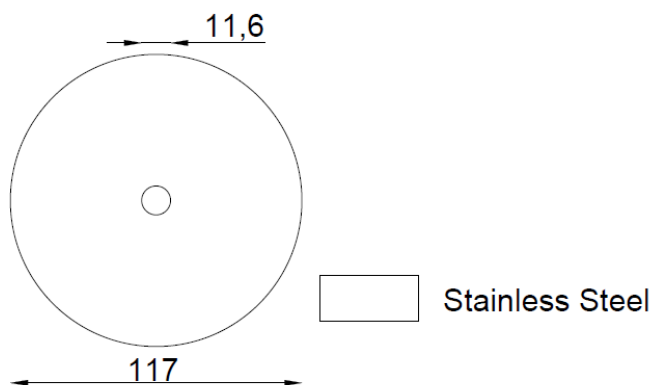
Mechanical drawing of Unit 5 – heat treatment (Side view; dimensions in mm)
